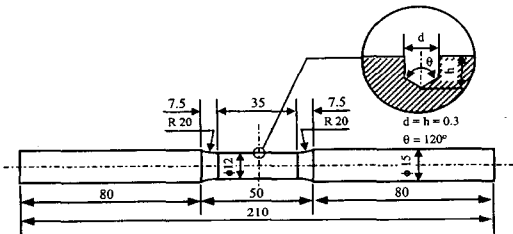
Shape and dimension of rotary bending fatigue test specimen
